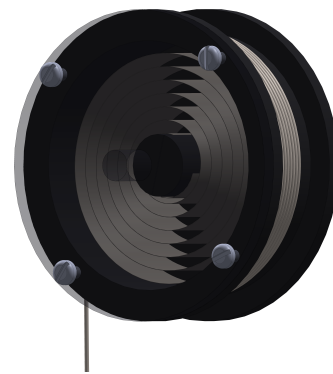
The spiral spring is housed within the spool and a removable lid with screw fasteners are used to retain the spring within the enclosure while allowing torque to be transferred through the spool shaft.
